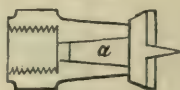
represents the hollow or cup-chuck; it is used for holding short pieces, or pieces that are to be turned out hollow. Its inside is turned slightly conical, so that the work may be driven tightly into it.
